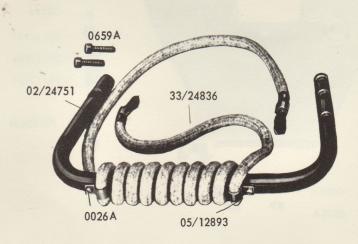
NEGATIVE CRUTCH ASSEMBLY (Part No 33/24405 Complete)
